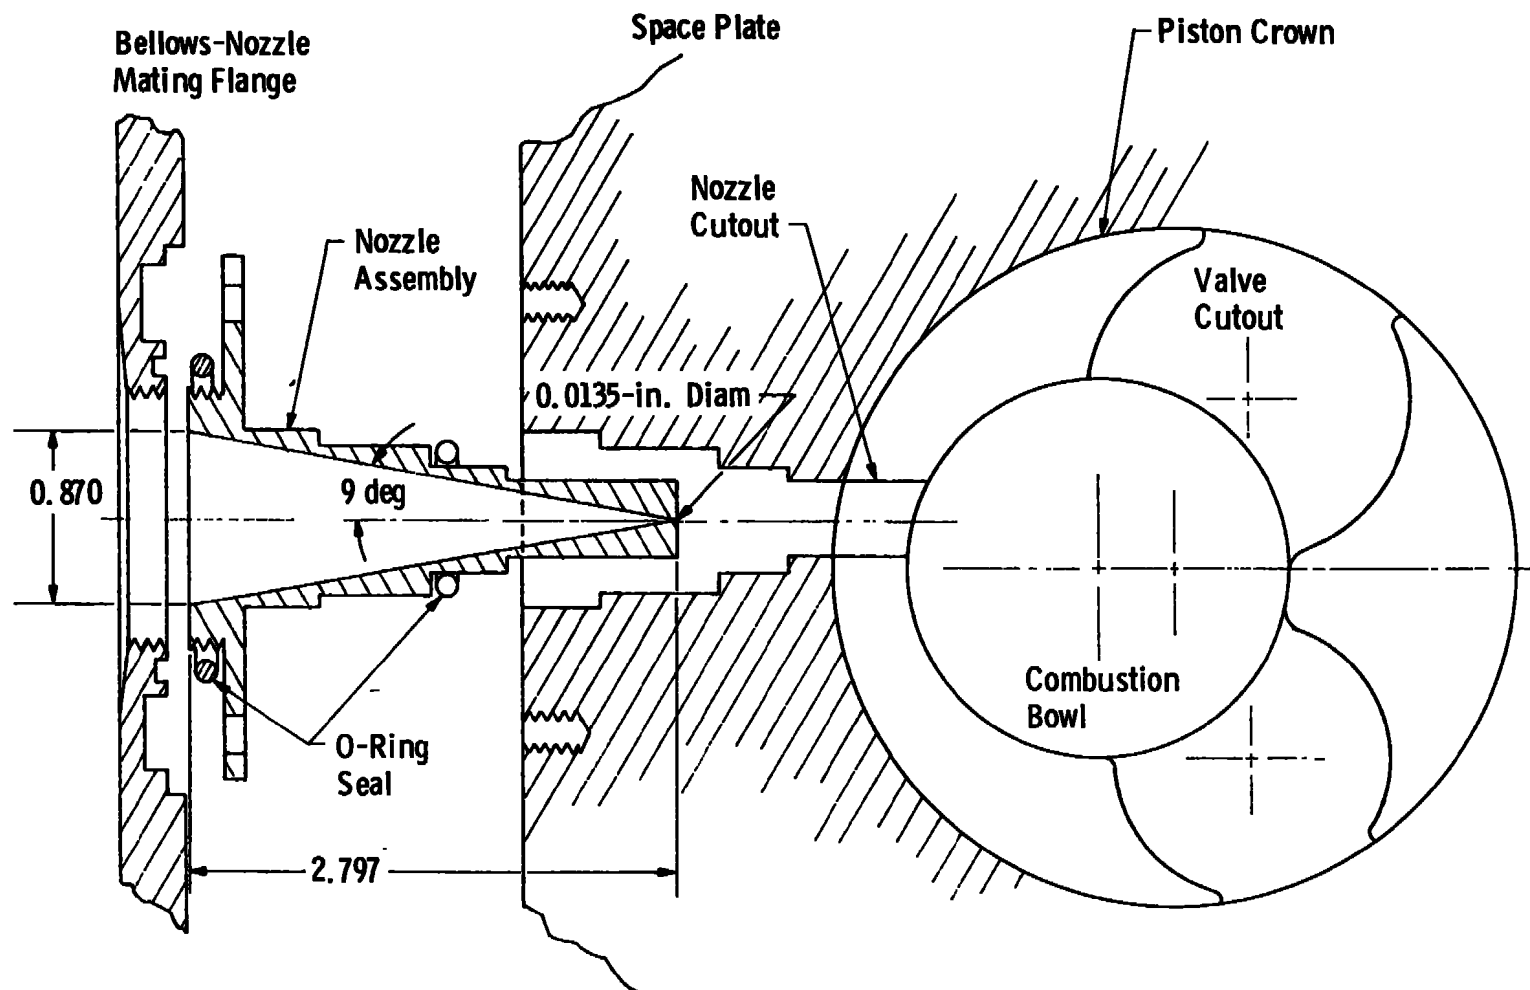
Top view of nozzle, spacer interface with TACOM diesel engine.
